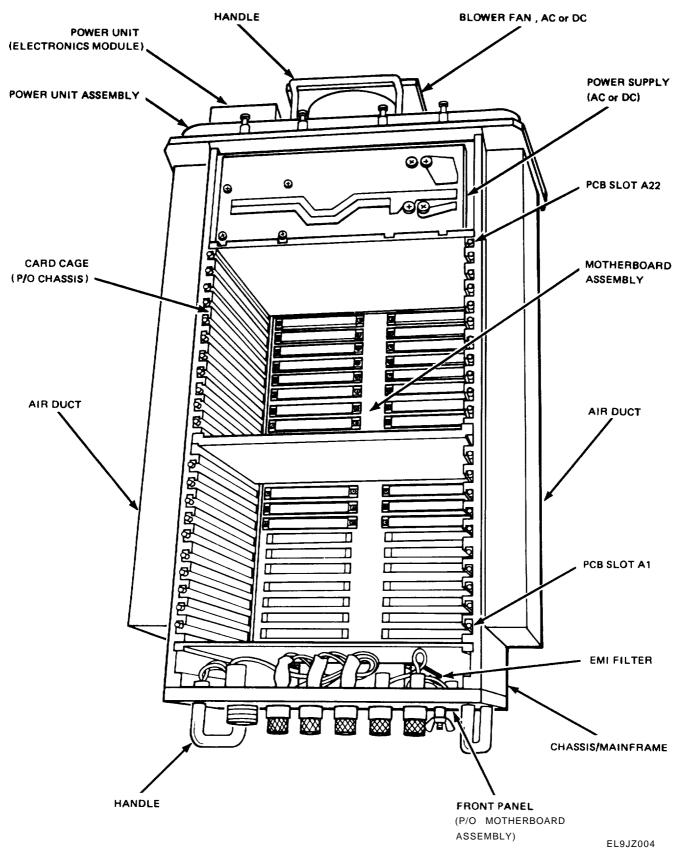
Processor Major Components, Top Cover Plate and PCBs Removed, Top View
